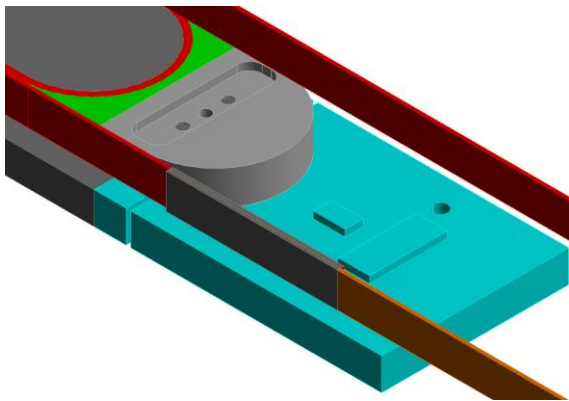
The mating cables are crimped with a point-welded foil.
